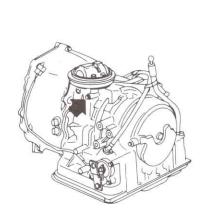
Governer shaft lockbolt location (Sec 9)
